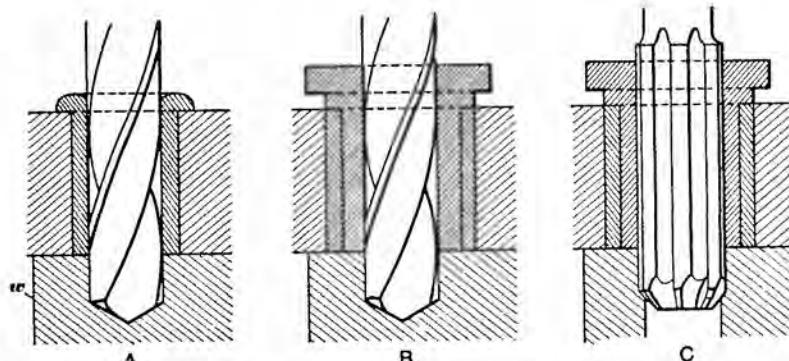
Fixed and removable guide bushings for drill jigs.
